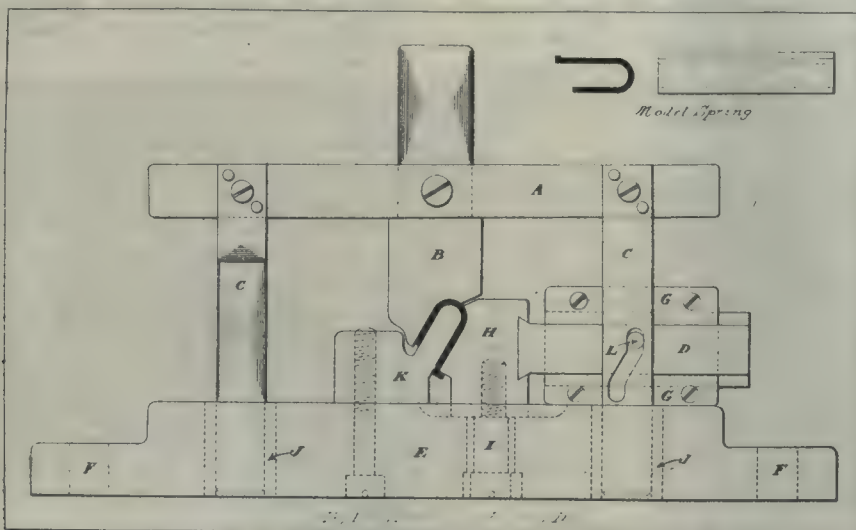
SUB-PRESS SPRING FORMING FIXTURE.
